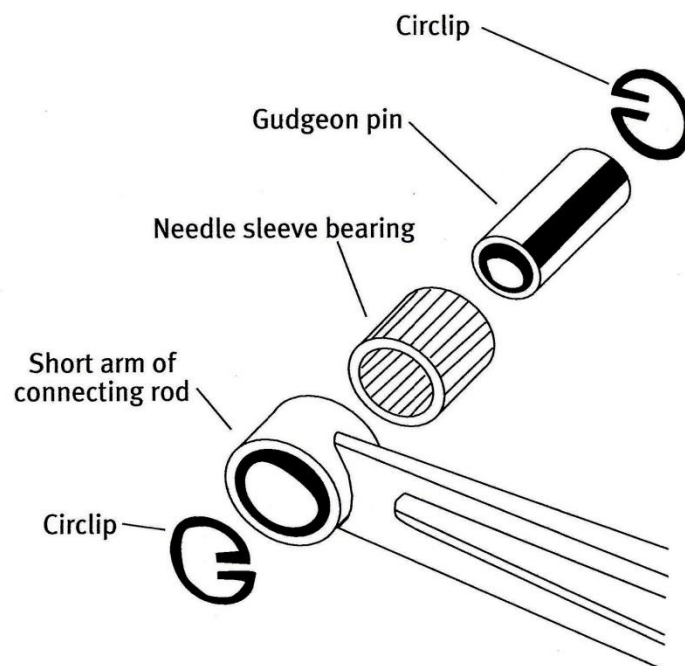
(b) The gudgeon pin connects the piston to the connecting rod
